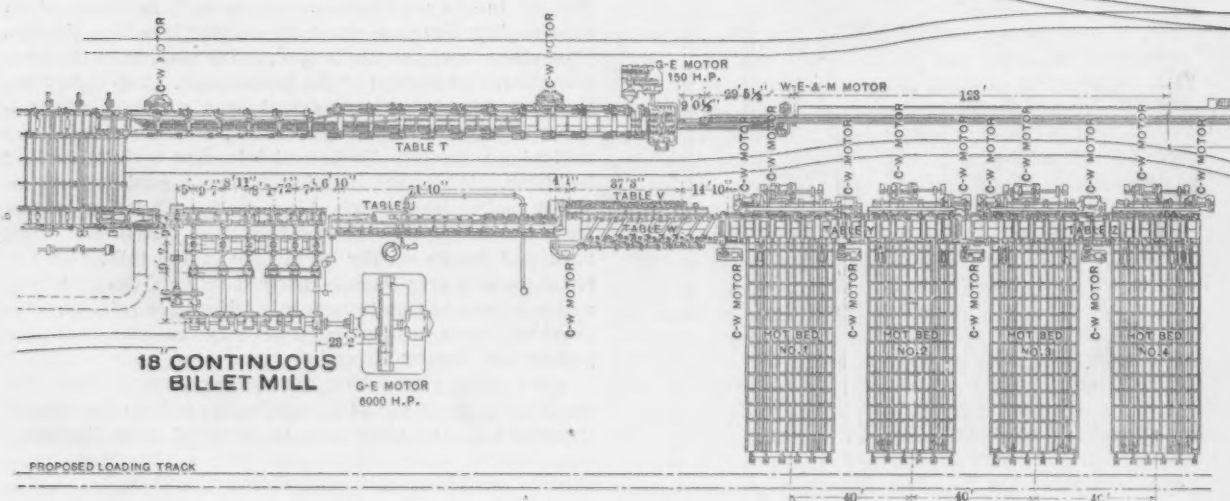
The 18-In. Mill Shown on a Larger Scale Than in Fig. 1.
